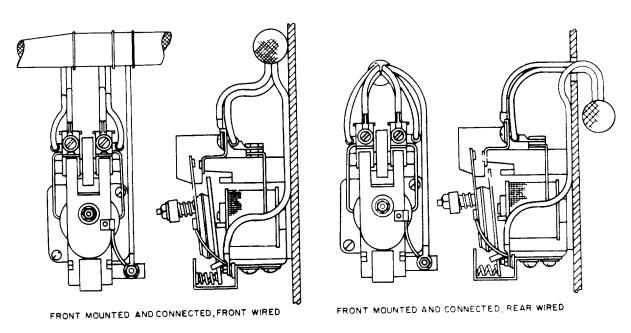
Contactors and Relays - Small Control - No. 14 Gauge and Smaller Wires
